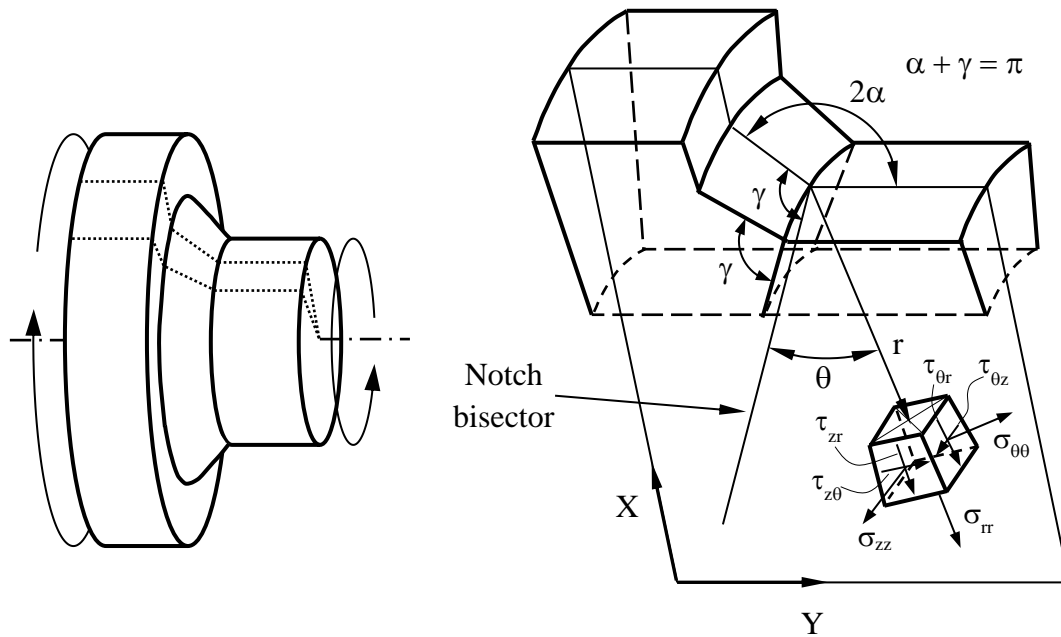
Polar reference system centred at the weld toe of a typical tube-to-flange welded joint geometry subjected to torsional loading.
